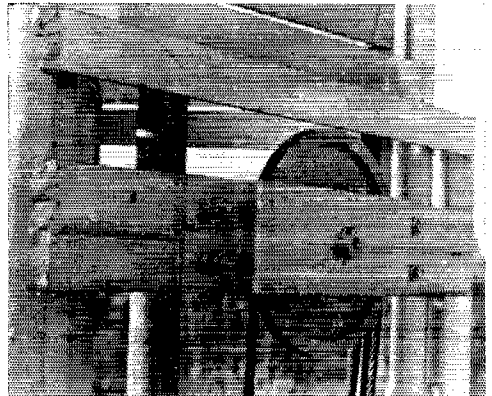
The pulley mounting is made of $\frac{3}{8}$ -inch steel. In this instance, the mounting bar is a double length of $1\frac{1}{2}$ -inch wide stock, but it can be made of a single piece 3 inches wide. If a shoulder is not provided on the pulley shaft, washers should be used between the pulley and the sheath to provide clearance for the pulley. The pulley shaft should be not less than $\frac{3}{4}$ inch in diameter.
